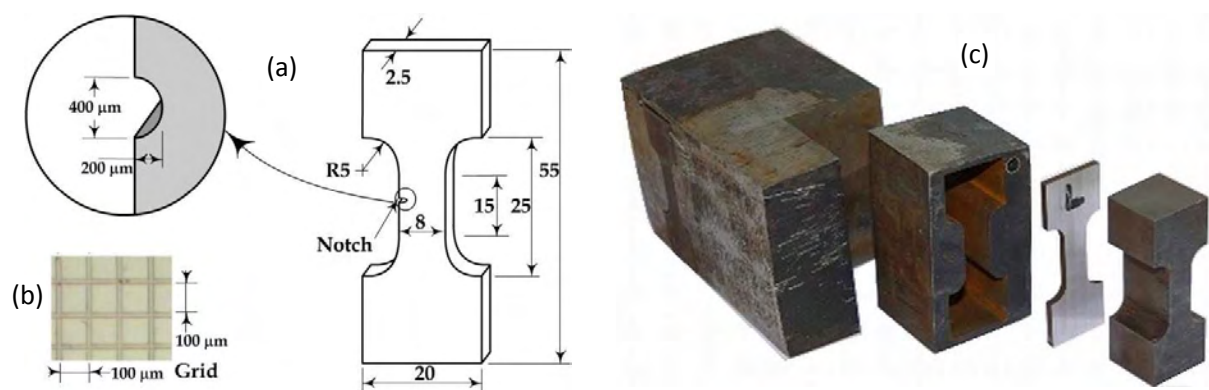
Specimen: (a) dimensions (b) engraved grid details and (c) different steps of manufacturing
